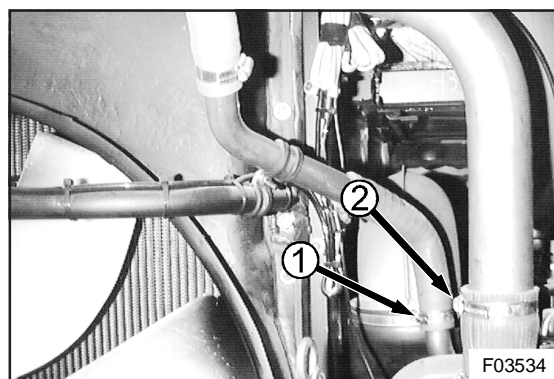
Lower hose clamps of surge tank filler tube (1) and radiator inlet tube (2)
